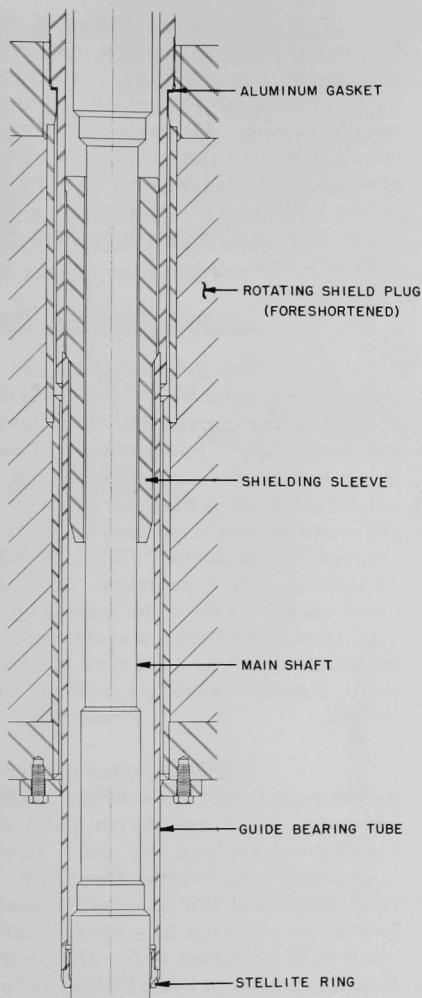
Main Shaft Shielding Section in Rotating Shield Plug
